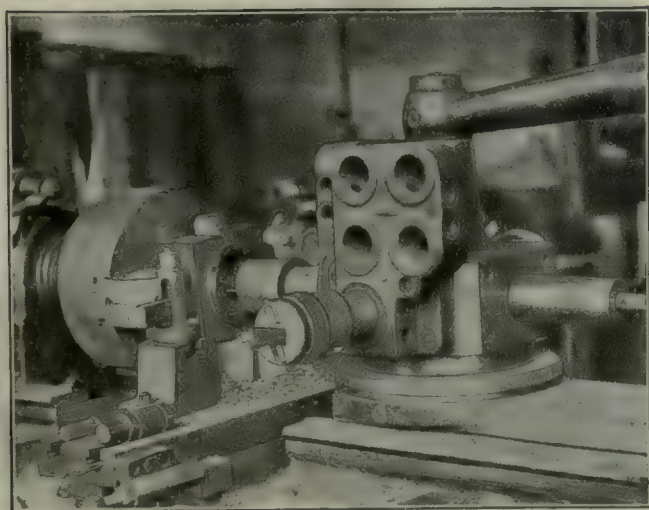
OPERATIONS ON A BEVEL-GEAR HOUSING
